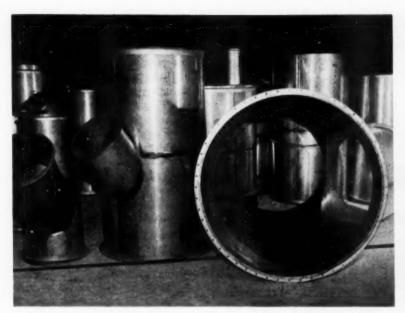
STAINLESS STEEL DUCT sections fabricated by welding with the inert gas shielded tungsten arc process. The large duct is about 5 ft in diameter
